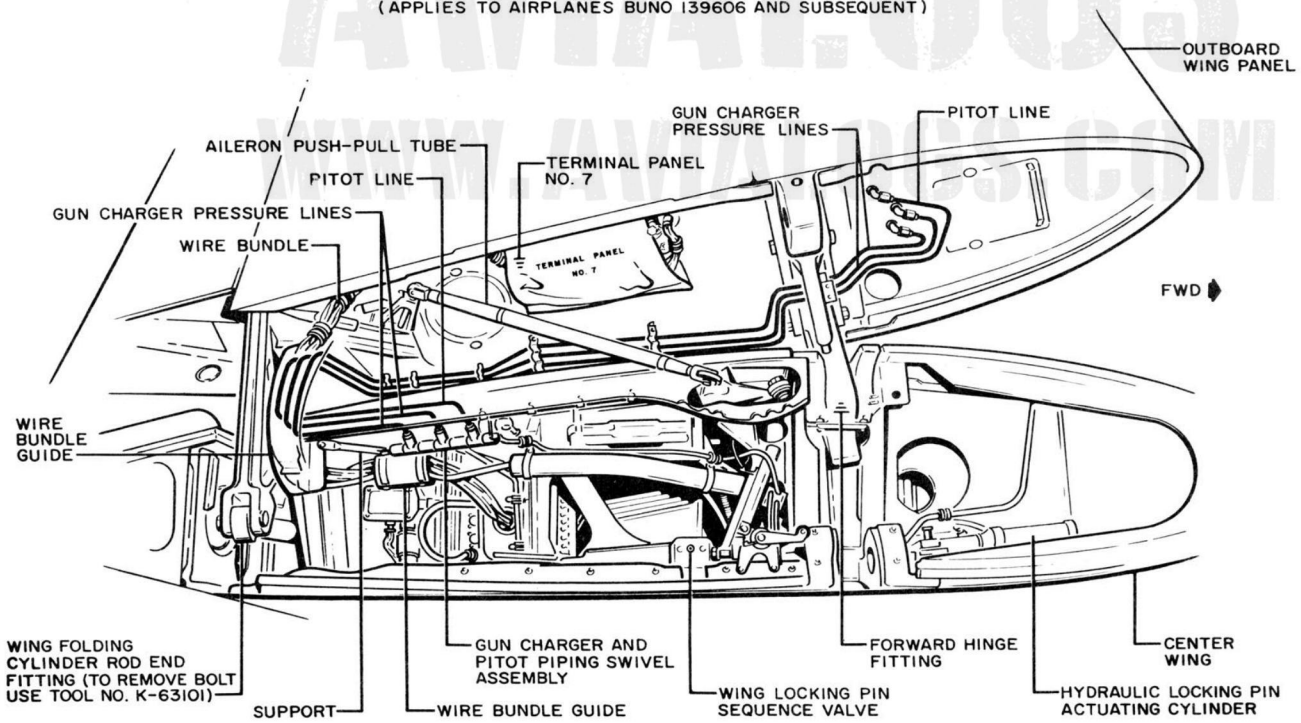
Outboard Wing Panel Installation (Sheet 1)
